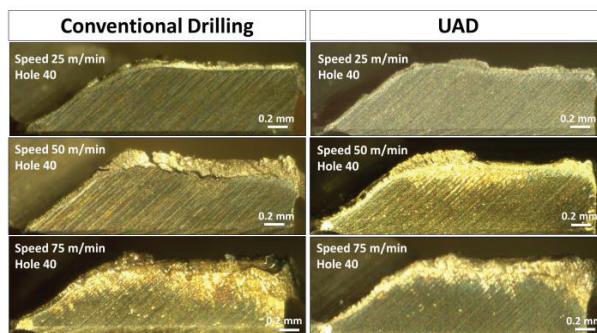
Tool wear after drilling 40 holes in CFC/Ti6Al4V stacks using cutting speed of 25, 50 and 75 m/min conventionally and with ultrasonic.
